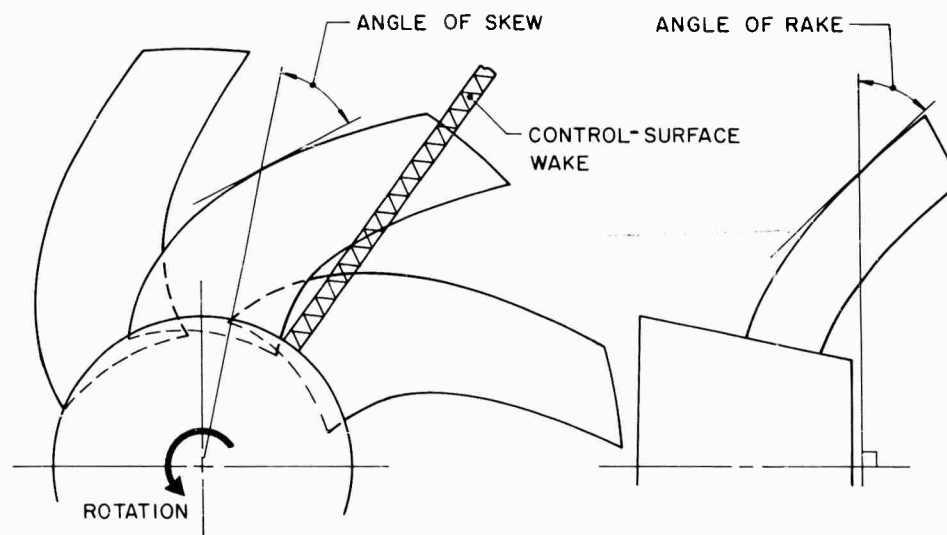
Rotor Blades that Are both Raked and Skewed
